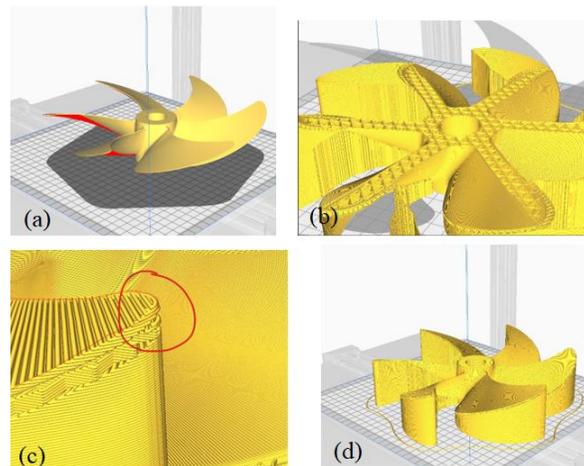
(a) Setting of 3D printing using STL file (b) infill ratio (c) The layer thickness of 0.2 mm (d) complete printed propeller
